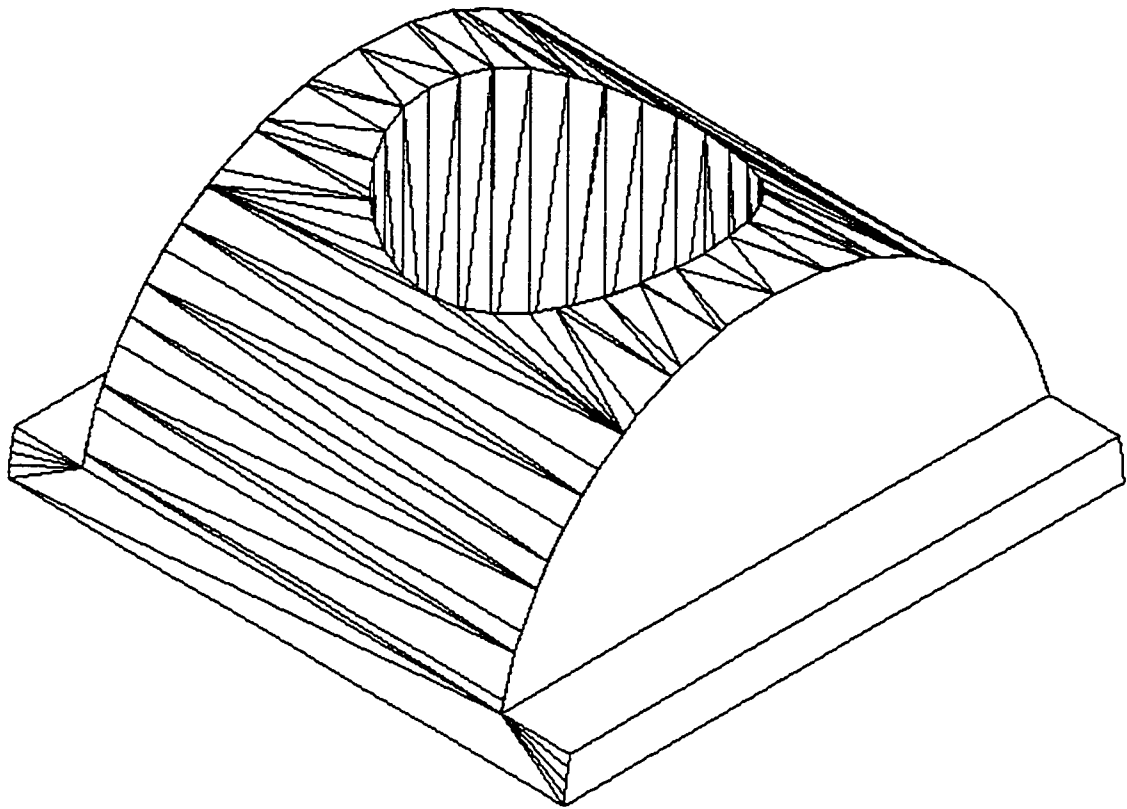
Workpiece Used for 3D Toolpath Experiments
